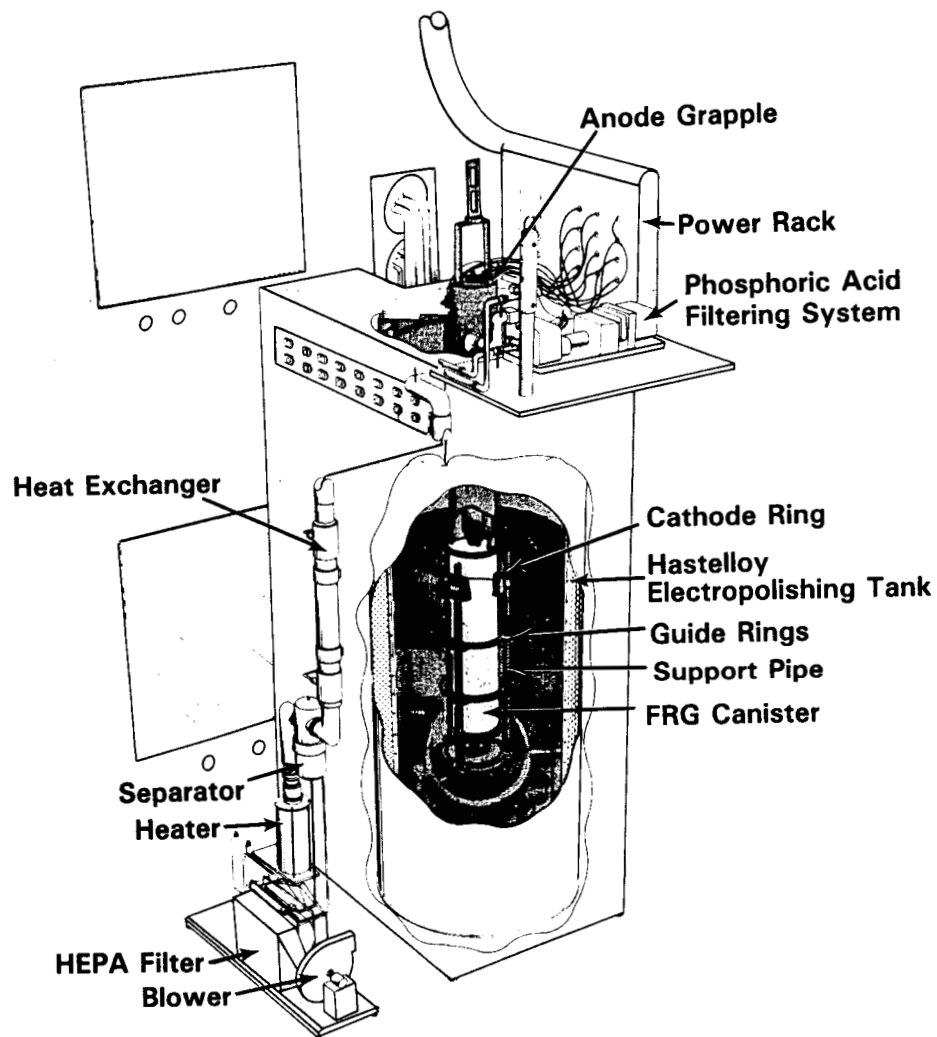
Cutaway Drawing of the Canister Electropolishing Equipment Rack
